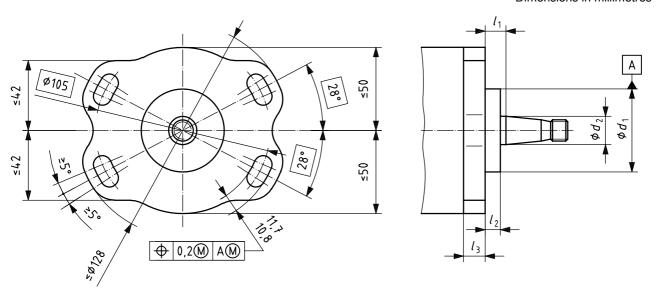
Fuel injection pumps — Type 3 end-mounting flange
